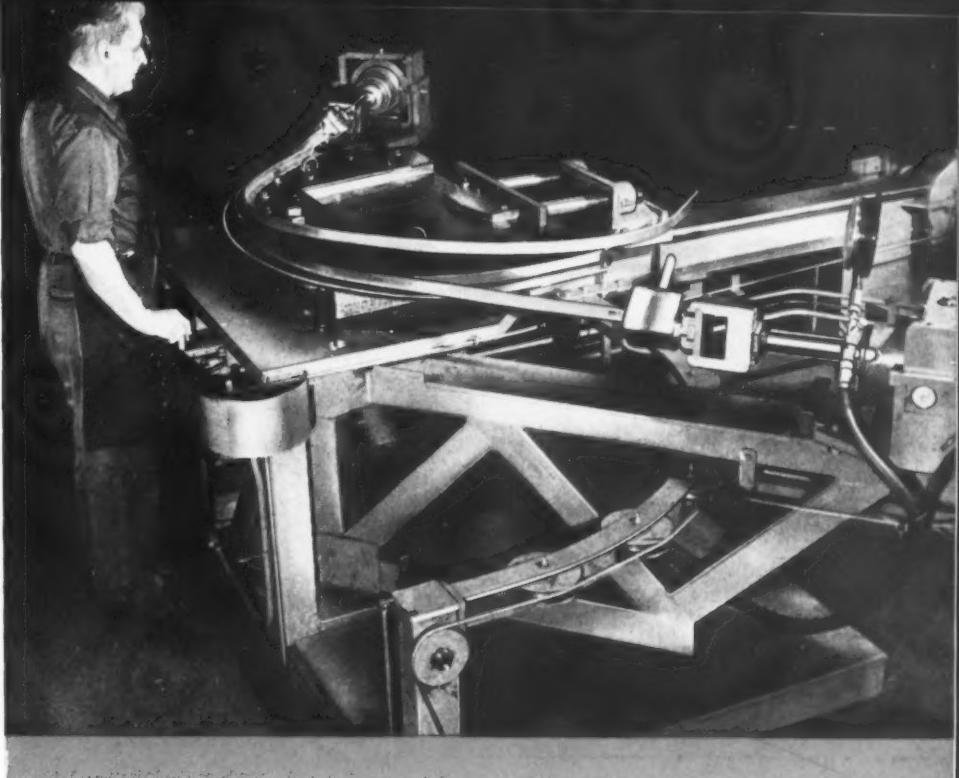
Fixture Provided with Springs that Hold a Cam in Contact with a Roller on the Cutter-spindle for Performing a Contour Milling Operation
